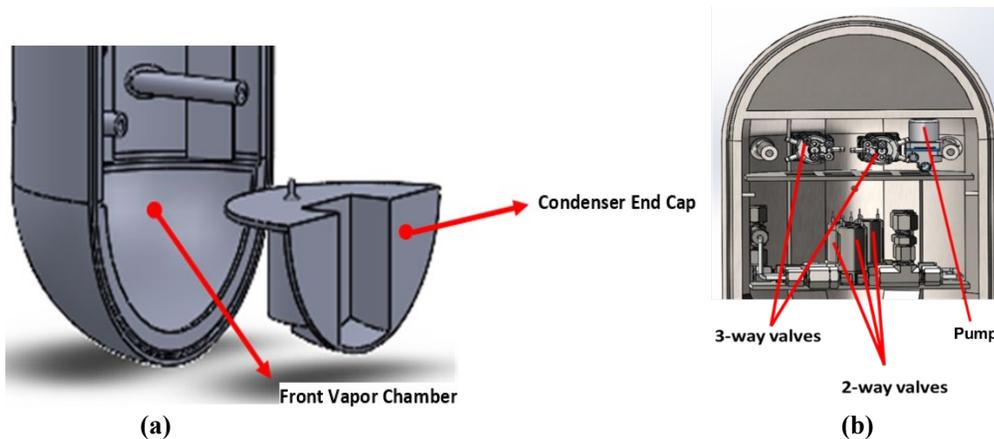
(a) Front vapor chamber space at the bottom of ACT's melting probe prototype (b) Liquid Displacement System (LDS) at the top of the melting probe prototype.
